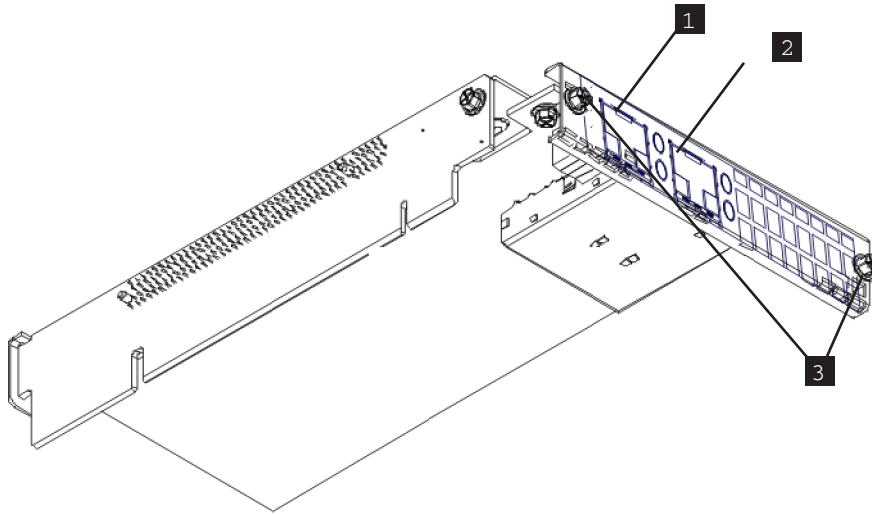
2145-CG8 10 Gbps Ethernet riser-card assembly with cutaway view of back rail
